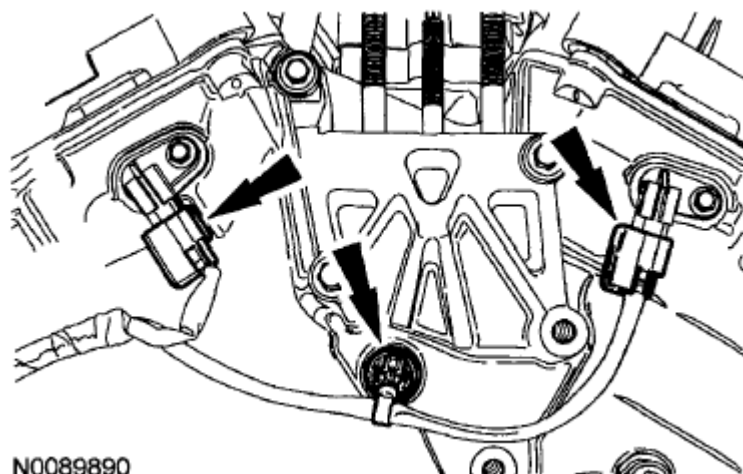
Locating Camshaft Position (CMP) Sensor Electrical Connectors And Wiring Harness Retainer
